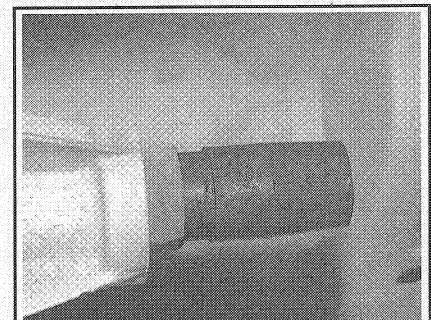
Insert a plug onto the splines of the transmission output shaft to prevent fluid from leaking out
